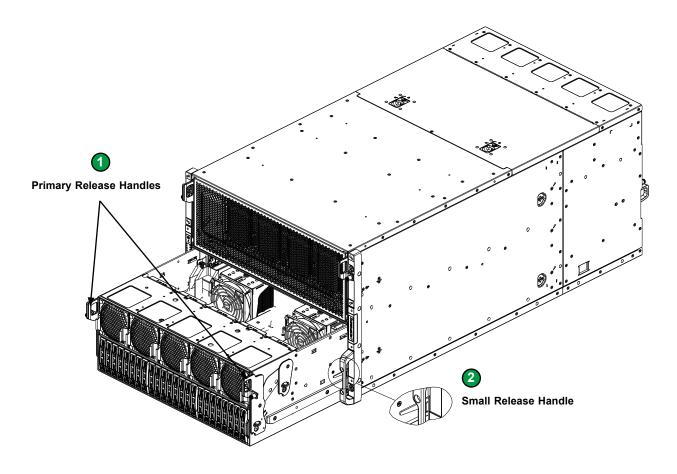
Chassis Front: Removing the Motherboard Tray
